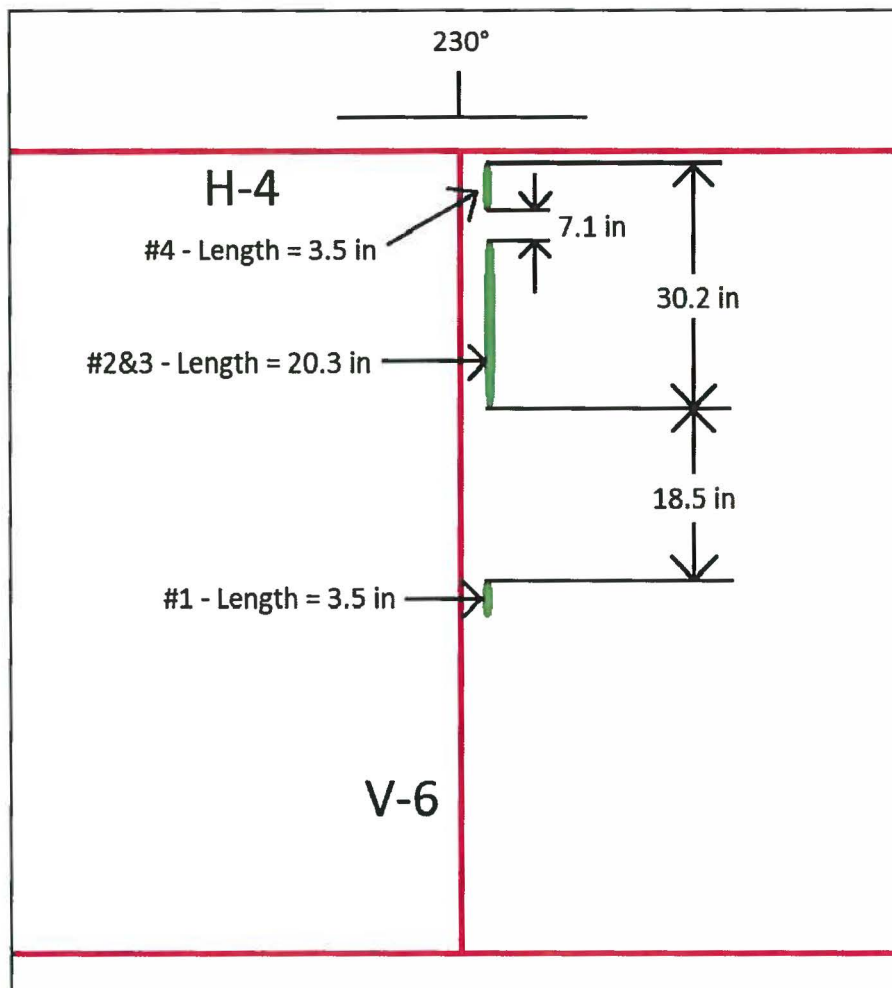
HNP1 V6 Weld Co-linear Indication Results
